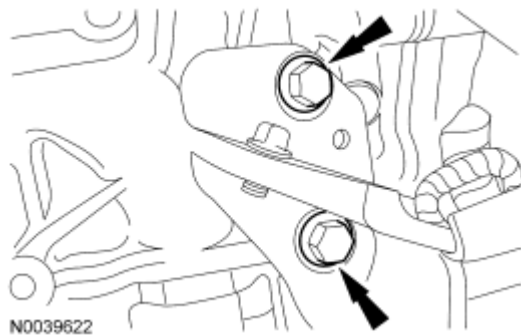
Locating RH Halfshaft Carrier Bearing Bracket Bolts
